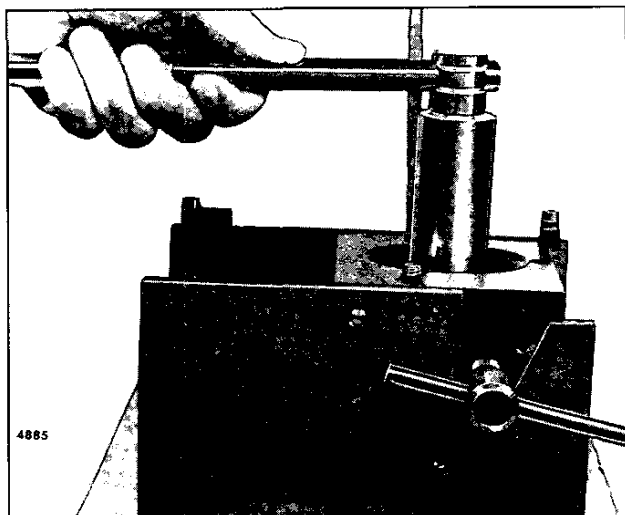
Removing Injector Nut Using Tool J 4983-01
